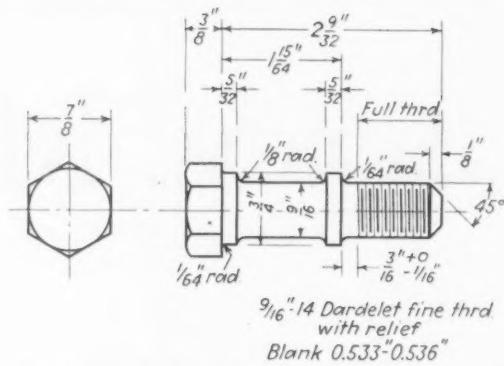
Special headed bolt in which the necked portion is turned. Steel used is SAE 1035.
